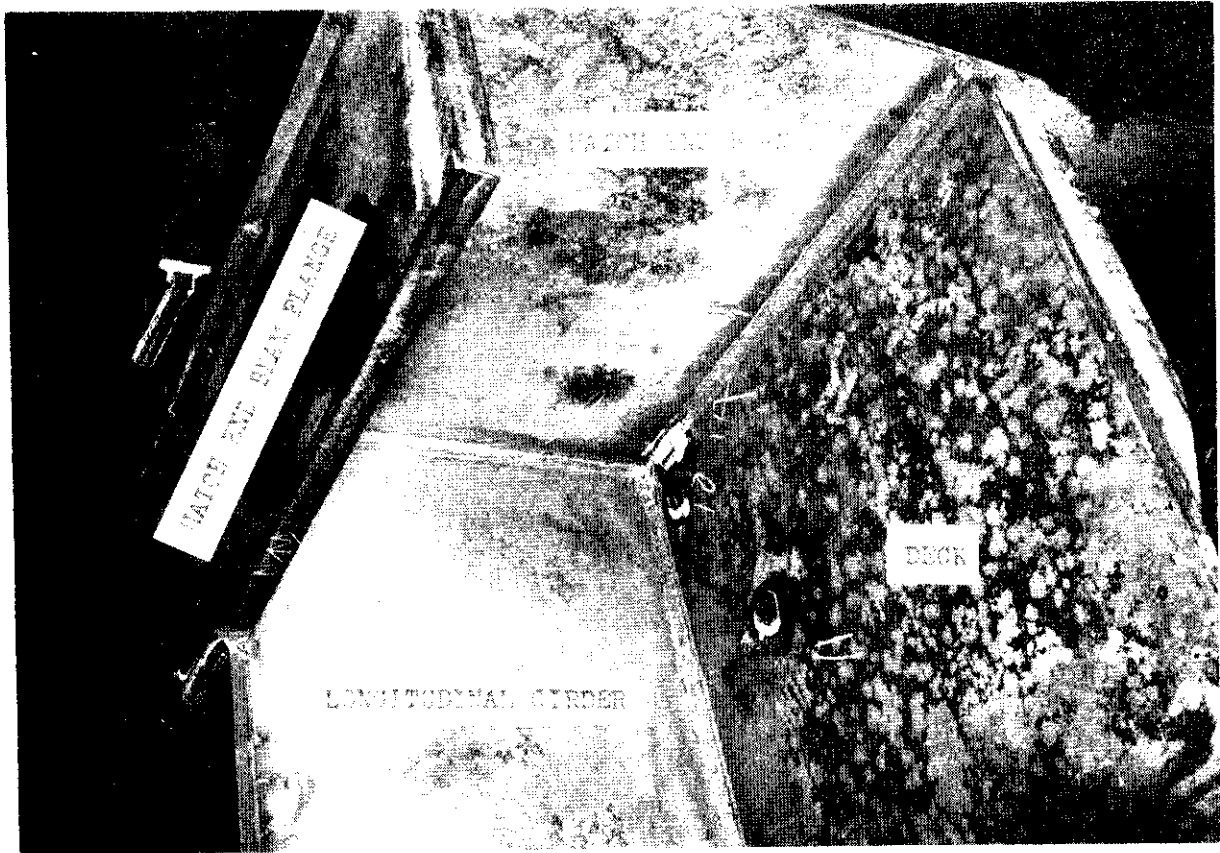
Specimen 27: View from below deck, inboard, showing absence of fractures
